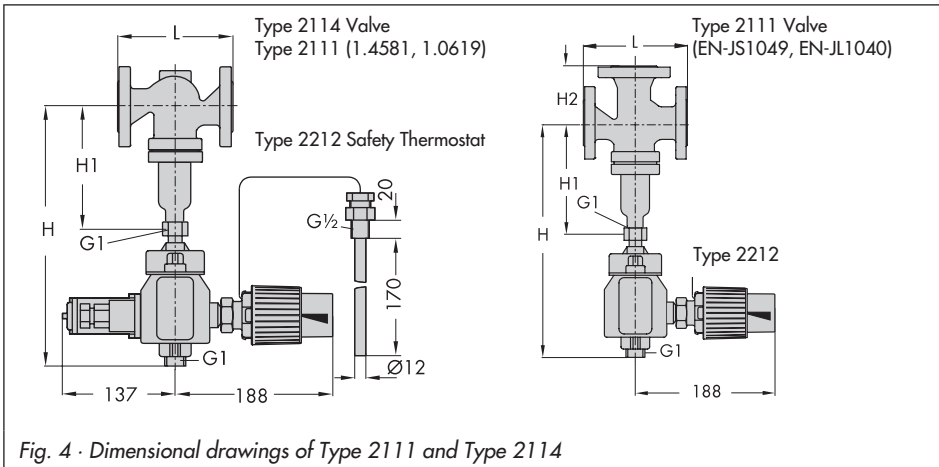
· Dimensional drawings of Type 2111 and Type 2114
